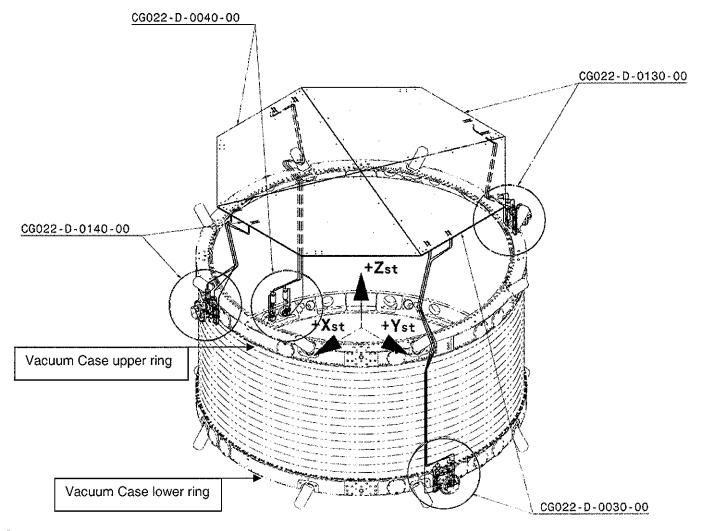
Cryocoolers location on AMS-02 vacuum case rings (highlighted in red)
